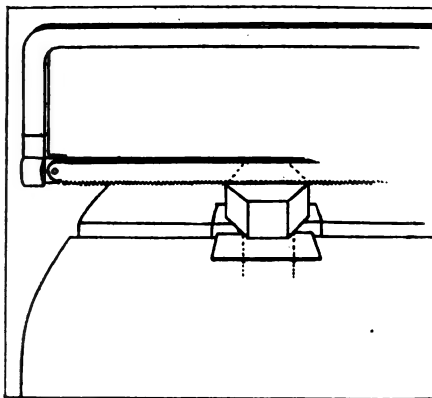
A Slot Cut in the Head of a Bolt Will Greatly Simplify Its Future Removal.
